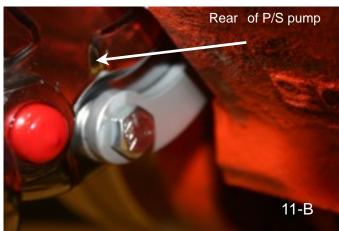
Mounting the P/S. If your P/S pump came with a mounting stud at the rear lower 6 o'clock position in the the pump use a 11/16 wrench and remove it .
